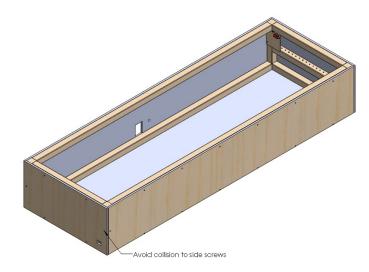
Attach side panels with shiny side inside. When screwing in make sure to avoid collision to side screws.
